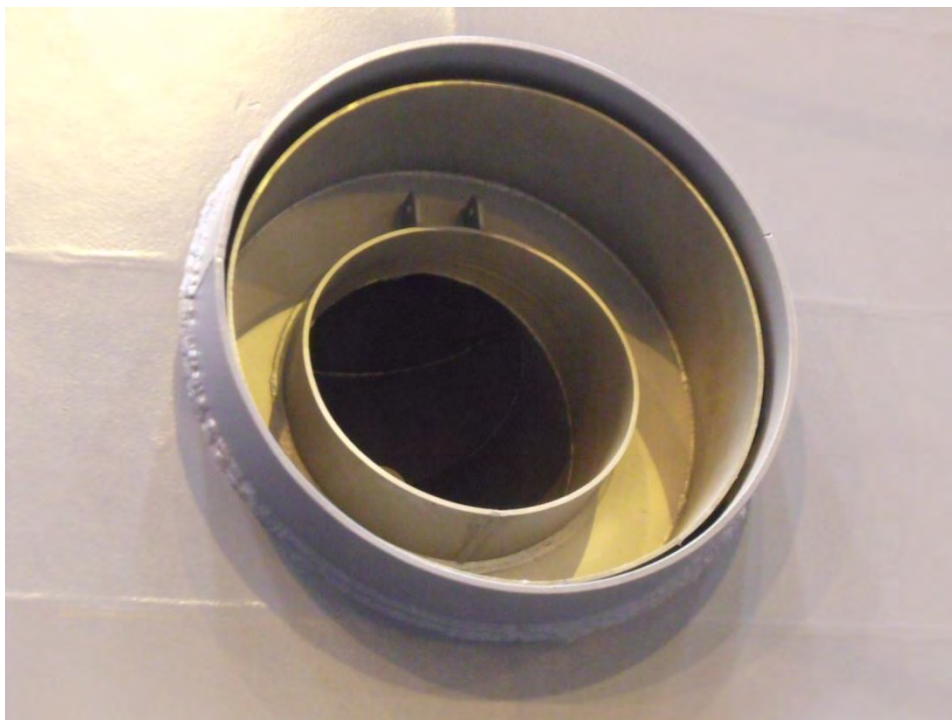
Typical Main Engine Exhaust Outlet (Flap removed for clarity)
